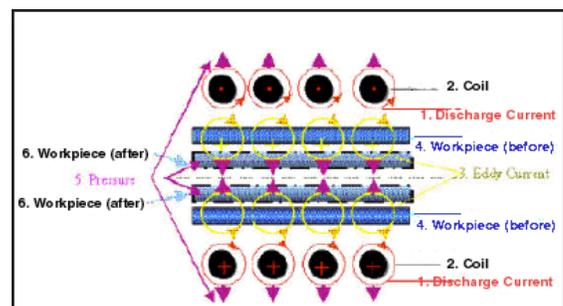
Magnetic Pulse Welding (MPW) principle.
